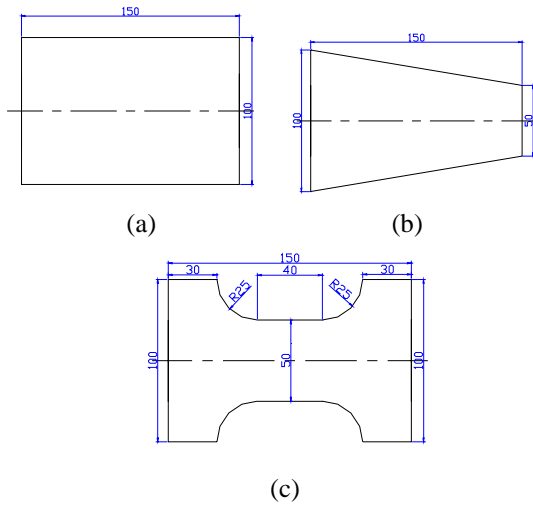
Geometry of molds (a) mold insert 1, (b) mold insert 2 and (c) mold insert 3
